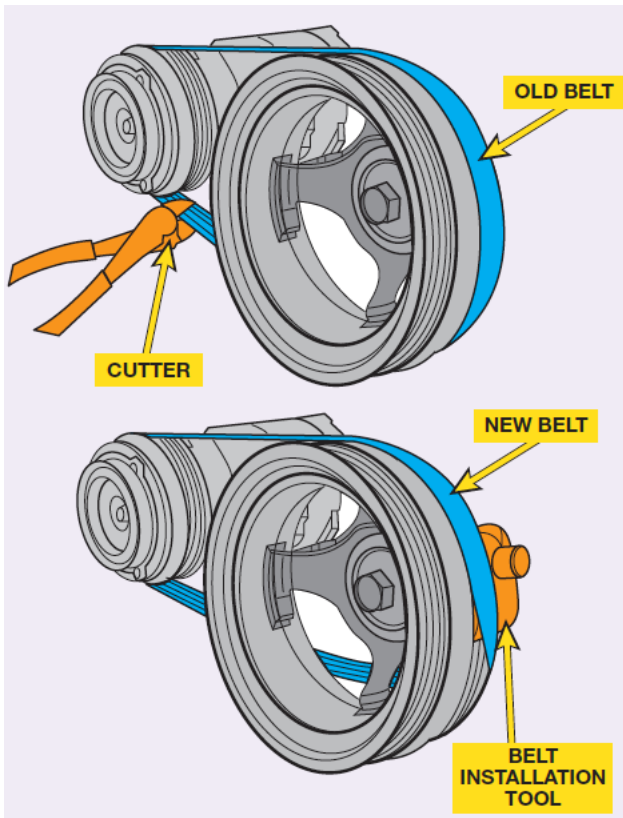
The belt is removed by cutting. Install the new belt using the plastic tool supplied with the new belt.
